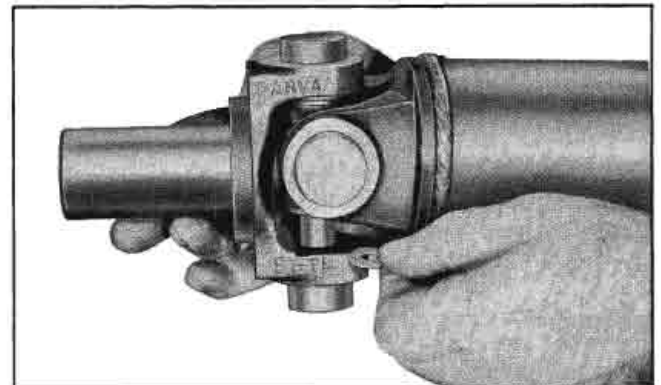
A-6 Placing Washers Inside Bearing of Splined Yoke Member
